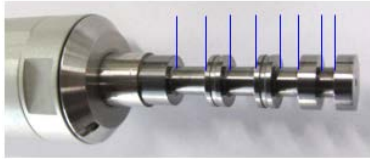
Adjusting lateral shaft position and placing the chosen ball on shaft
